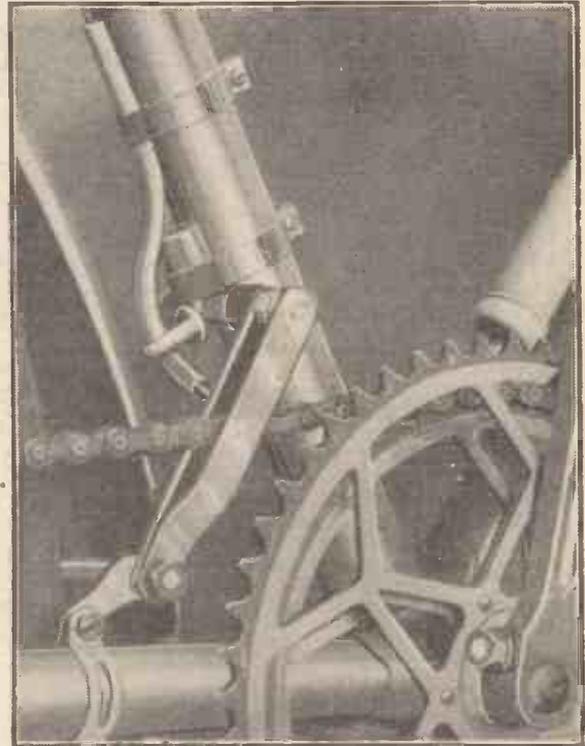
A close-up view of the two-speed gear fitted to a cycle.
